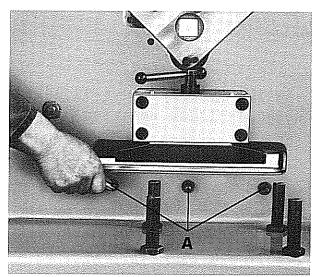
Changing the lower flat steel balde (KBLH 300)
